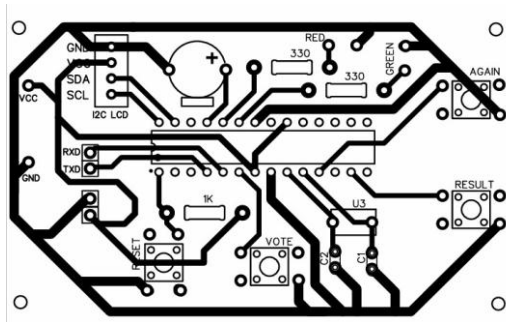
PCB Trace Layout Environment generated via EasyEDA tool.
